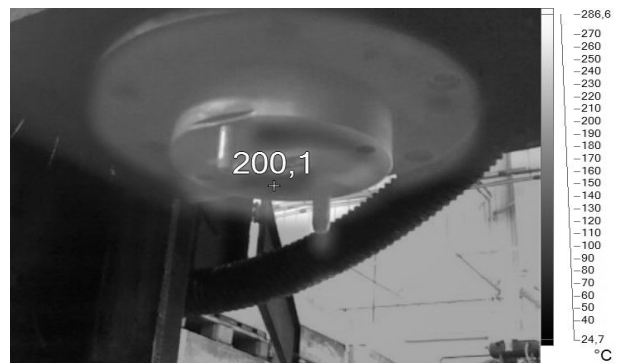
View of the single cavity for the slide block in the lower die for manual forging process
